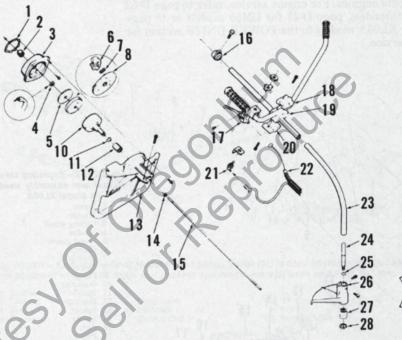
Exploded view of ST-400 brushcutter.
